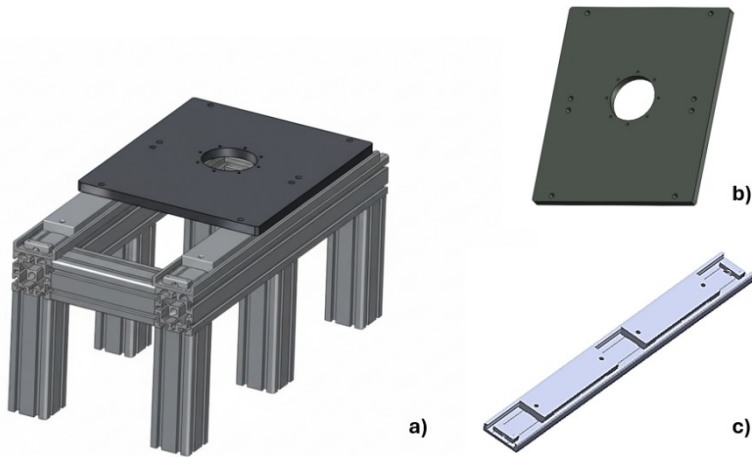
Representation of the sliding horizontal platform and its support structure: (a) overall assembly, (b) steel platform, and (c) linear ball bearings.
